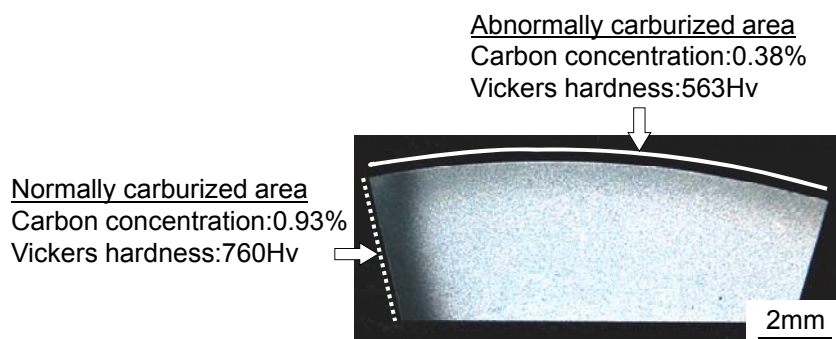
Carburized SCM420Nb specimen after severe machining.
